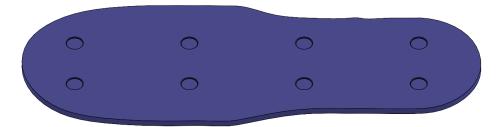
CAD Model of Bottom of Preliminary Sensing Module Assembly
